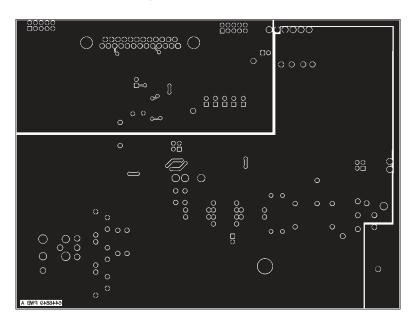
PGA2500EVM PCB Bottom Layer (Solder Side)
